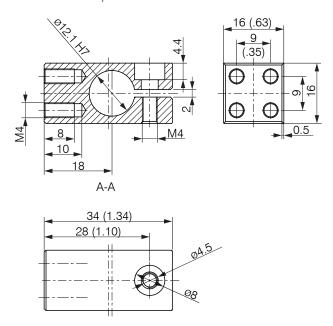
Outer clamps with installation bracket MA2404-12 for IFS2404-2, IFS2404/90-2 and IFS2407-0,1 sensors, dimension in mm (Inch)
